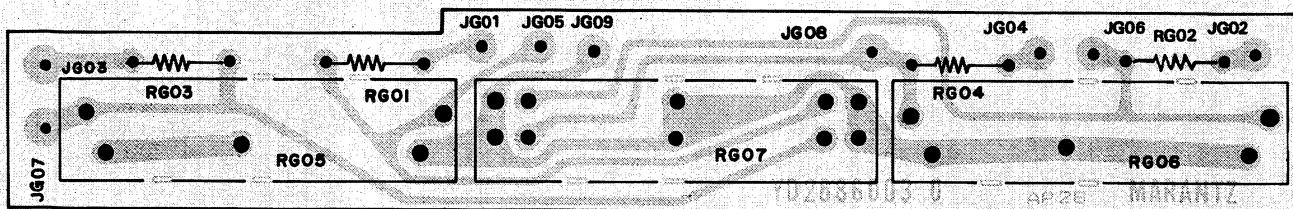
Balance Control Unit Assembly PG01 Component Locations
